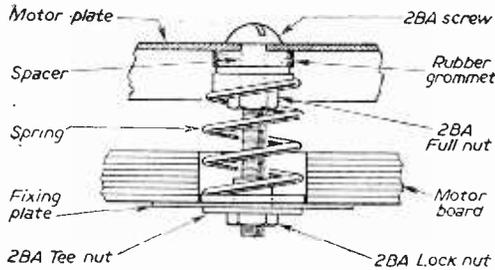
Showing the method of spring suspension of the autochanger to the motor board.
